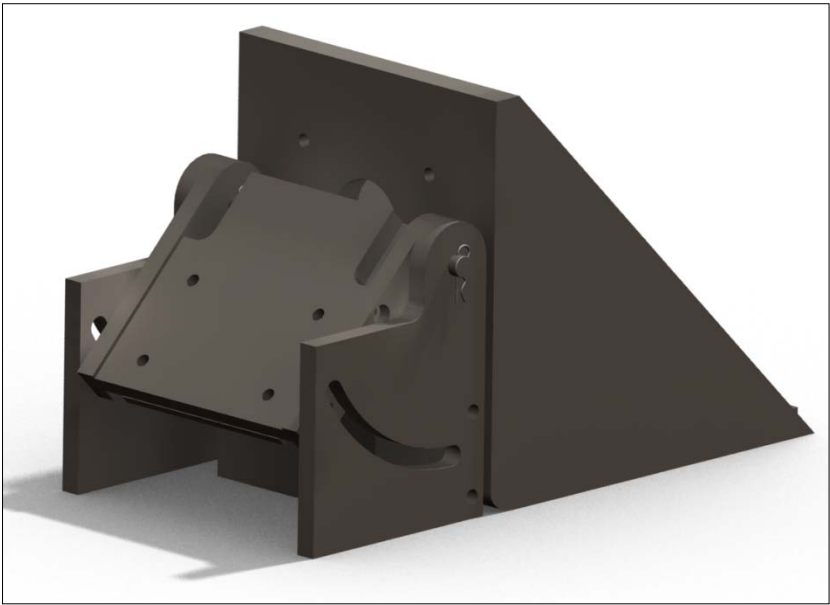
Schematic of die assembly used for sheet metal drawing.
